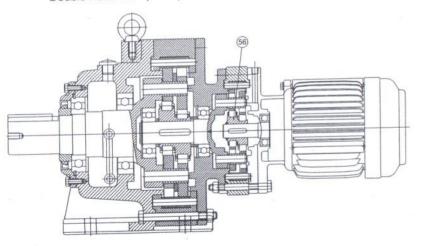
Fig. I Type TDVM (Vertical Gearmotor) Single Reduction (Example: Frame xize 614)
